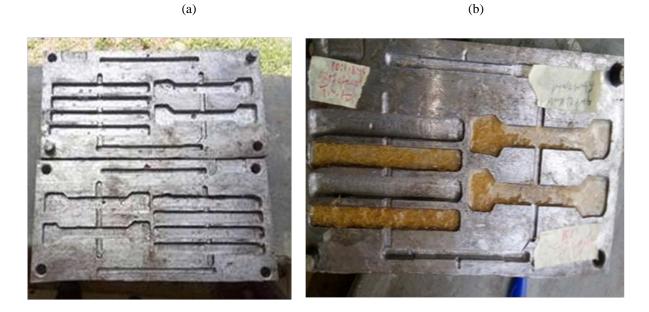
(a) Fabricated Mild Steel Mold and (b) Mild Steel Molds filled with Polymer Samples.
